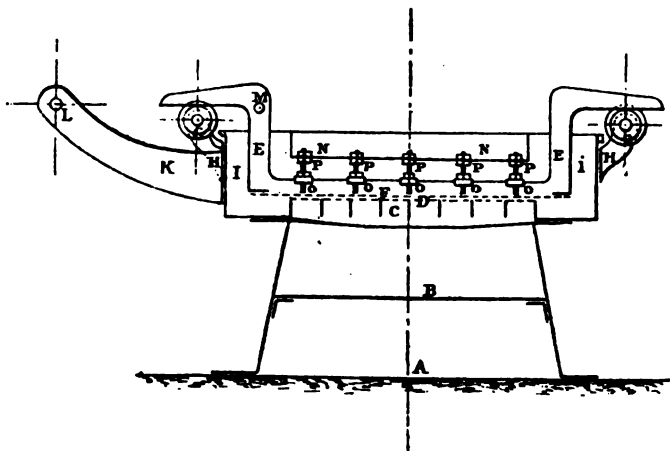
FEEDING MACHINE, STETEFELDT FURNACE.
